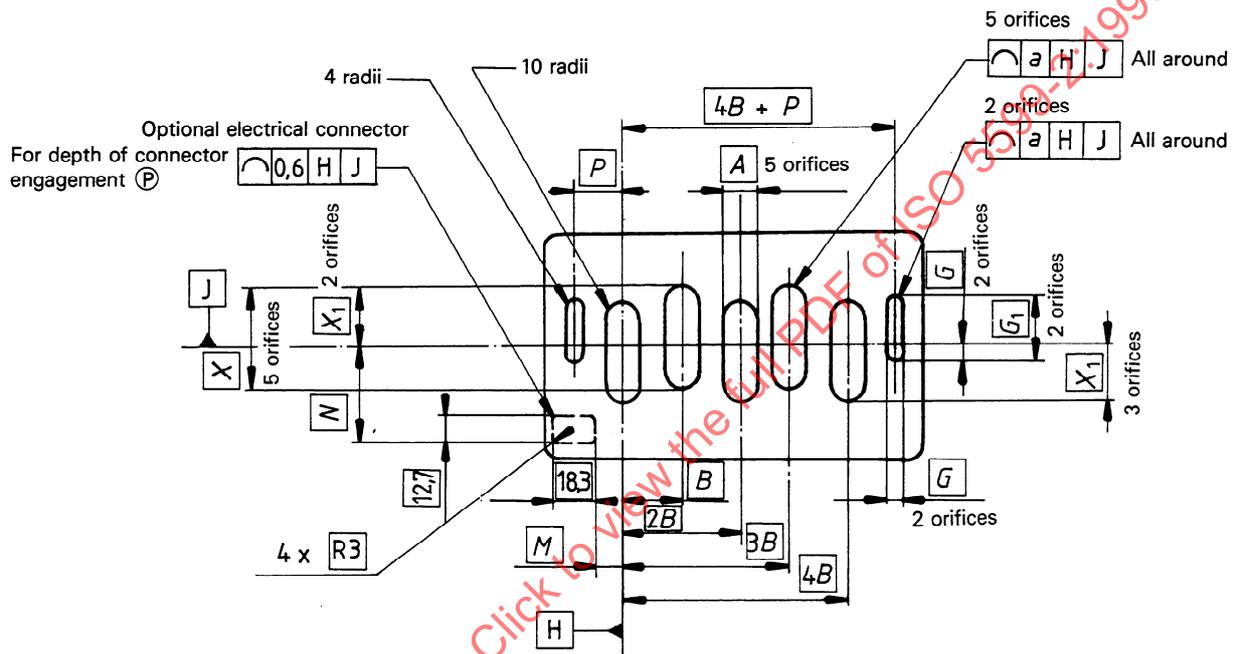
Dimensions and tolerances of form of interface features — Sizes 4E, 5E and 6E
